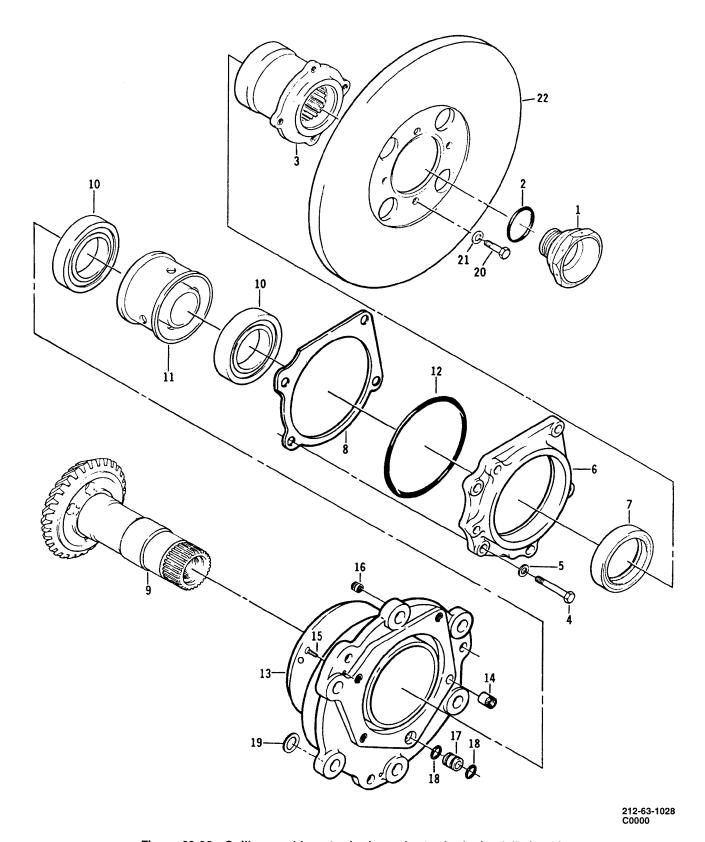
Quill assembly, rotor brake and rotor brake instlallation kit
